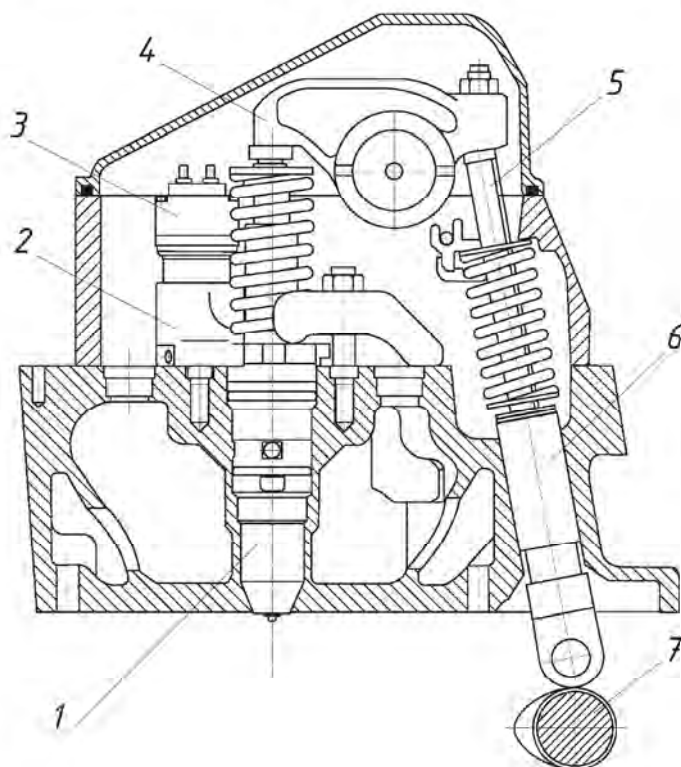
Installation of a pump-injector in the cylinder cover of a high-speed marine diesel engine 3600 series from Caterpillar. 1 – pump-injector; 2 – supply control valve; 3 – solenoid valve; 4 – pump-injector drive rocker arm; 5 – rod; 6 – pusher; 7 – pusher drive cam (adapted from [9])
